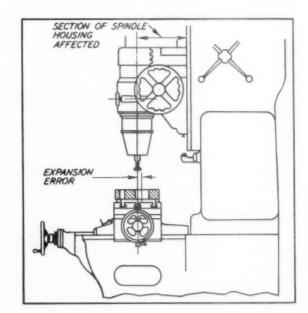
A temperature rise in the spindle housing during operation causes expansion which displaces the spindle axle.
